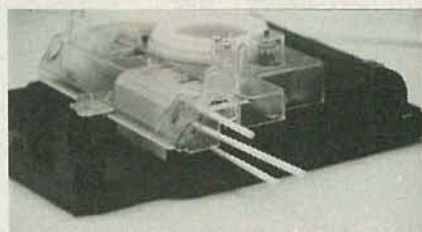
YOU WILL HAVE TO MODIFY the base and gear cover to accommodate the shafts.
